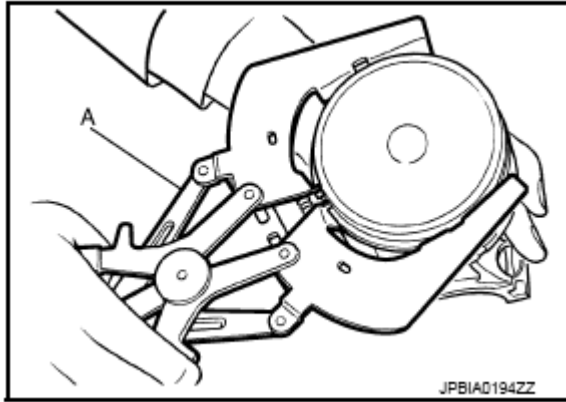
Removing Piston Rings From Piston Using Piston Ring Expander
